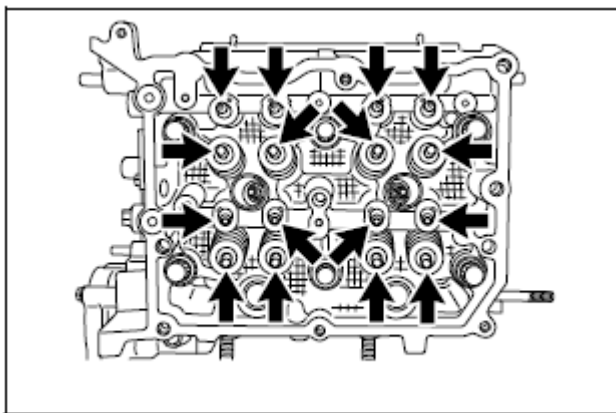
Identifying LH Cylinder Head Valve Adjusting Shims And Roller Rocker Arm Pivot
